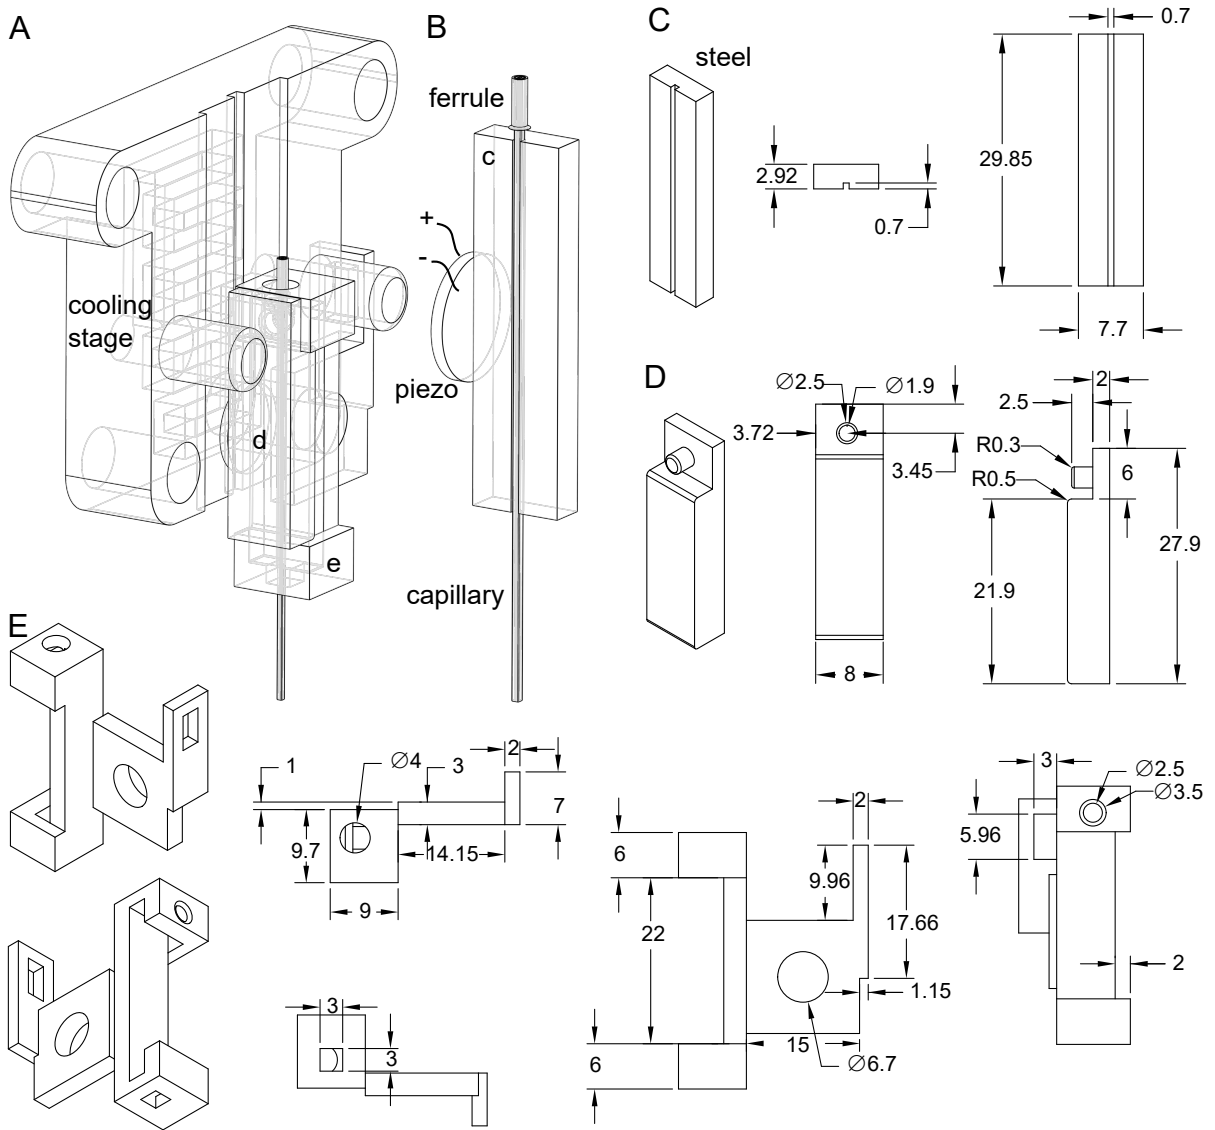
Ink writing assembly. Dimensions of adapters are shown in mm.
